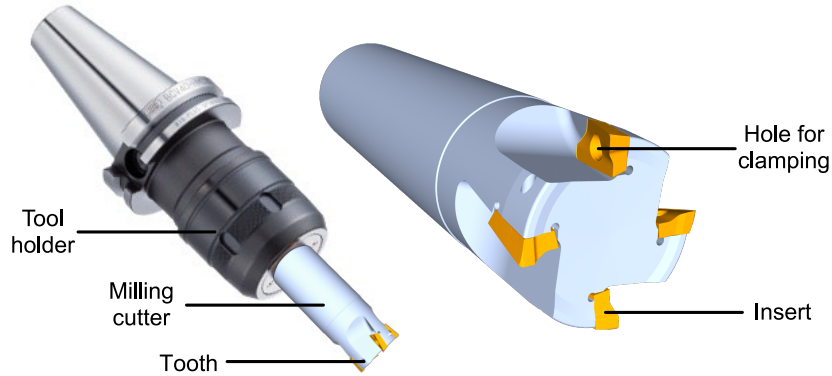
Tool geometry elements of a four-tooth milling cutter
